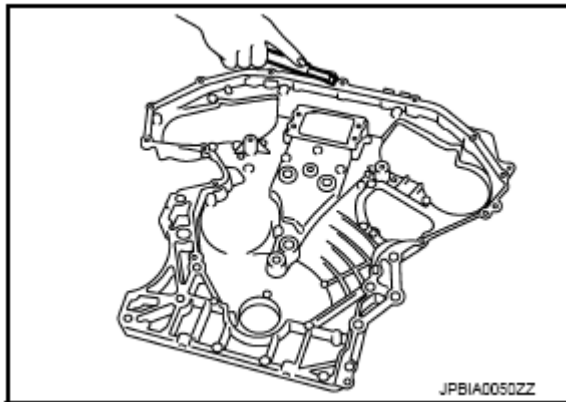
Removing Traces Of Liquid Gasket From Front, Rear Timing Chain Cases And Upper Oil Pan Using Scraper
